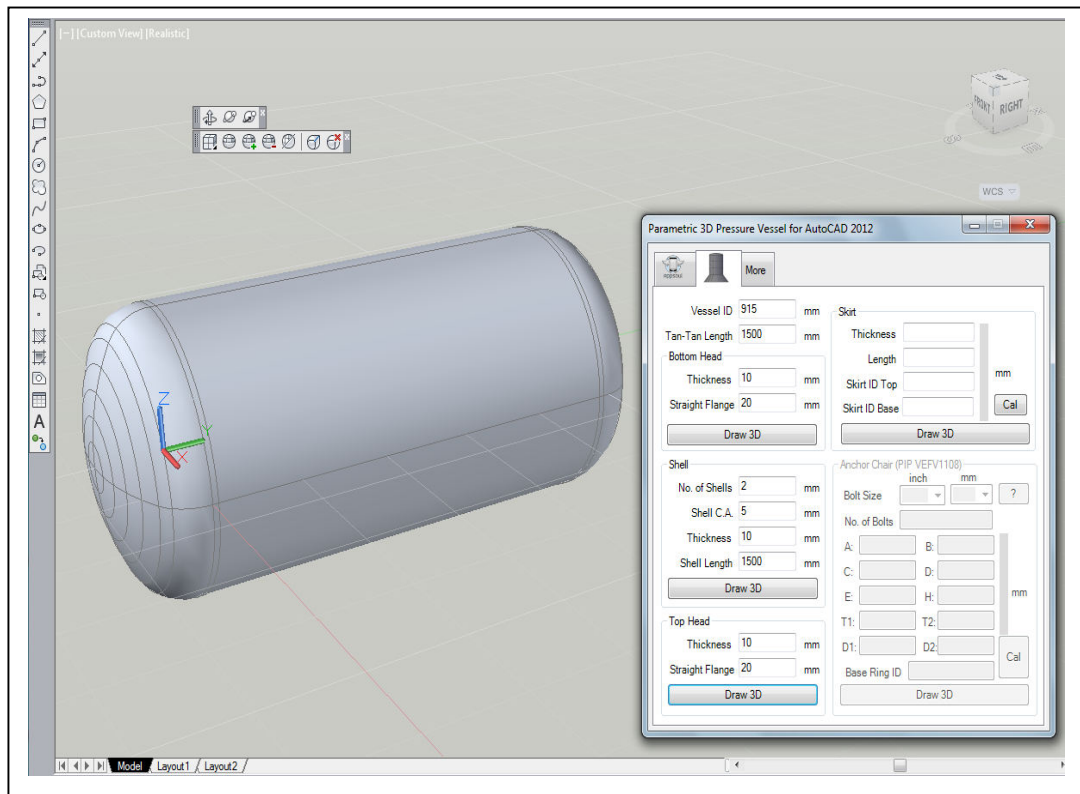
Generated Pressure Vessel Drawing Using AutoCAD Plug-In
